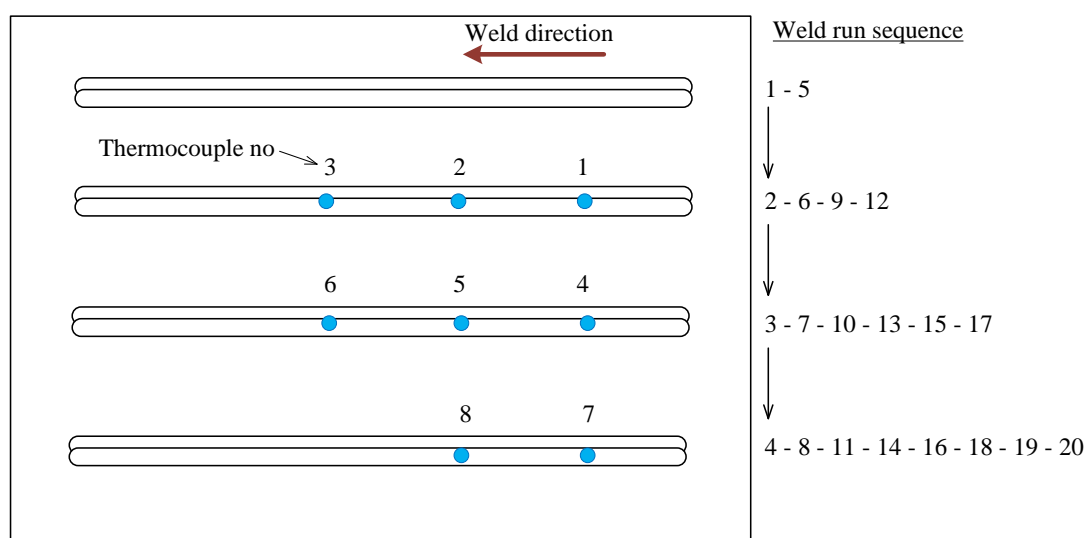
BoP weld test plate with imbedded thermocouples
